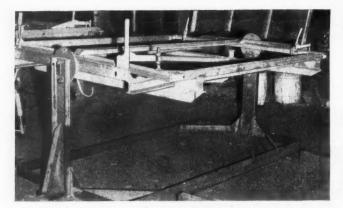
View of Jig which was Designed to Hold Door Frames Rigid During Welding.
